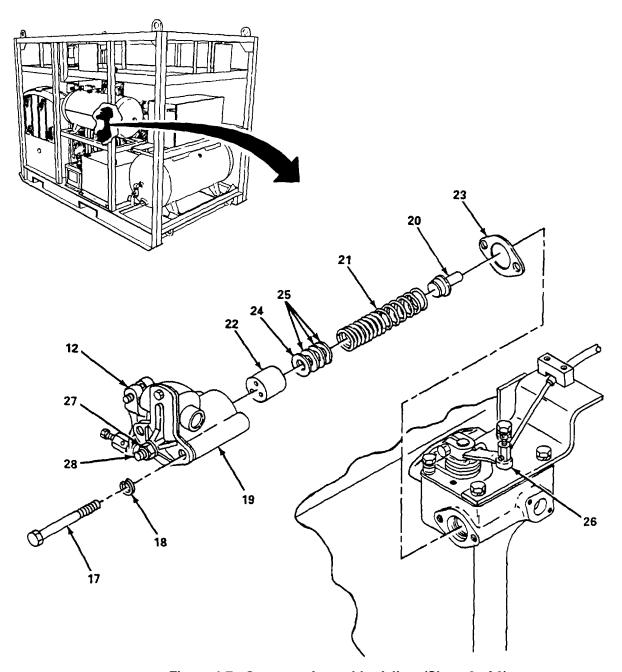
Governor Assembly, Adjust (Sheet 2 of 2).
